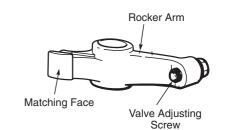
Valve Rocker Arm and Adjusting Screw
